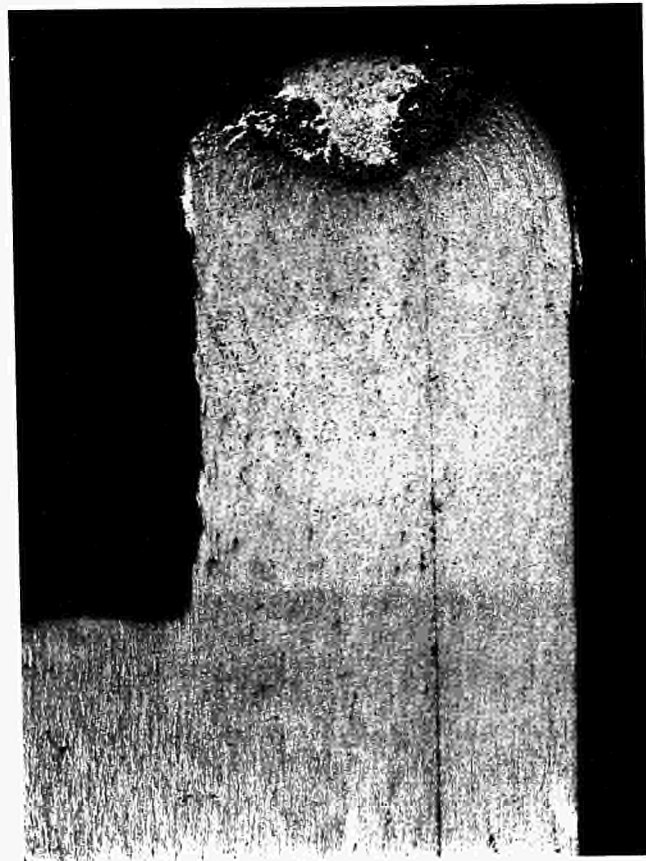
End-plug type a - welding of S.A.P. Montecatini 930 degassed 24 hrs at 625°C . ($\times 25$)
